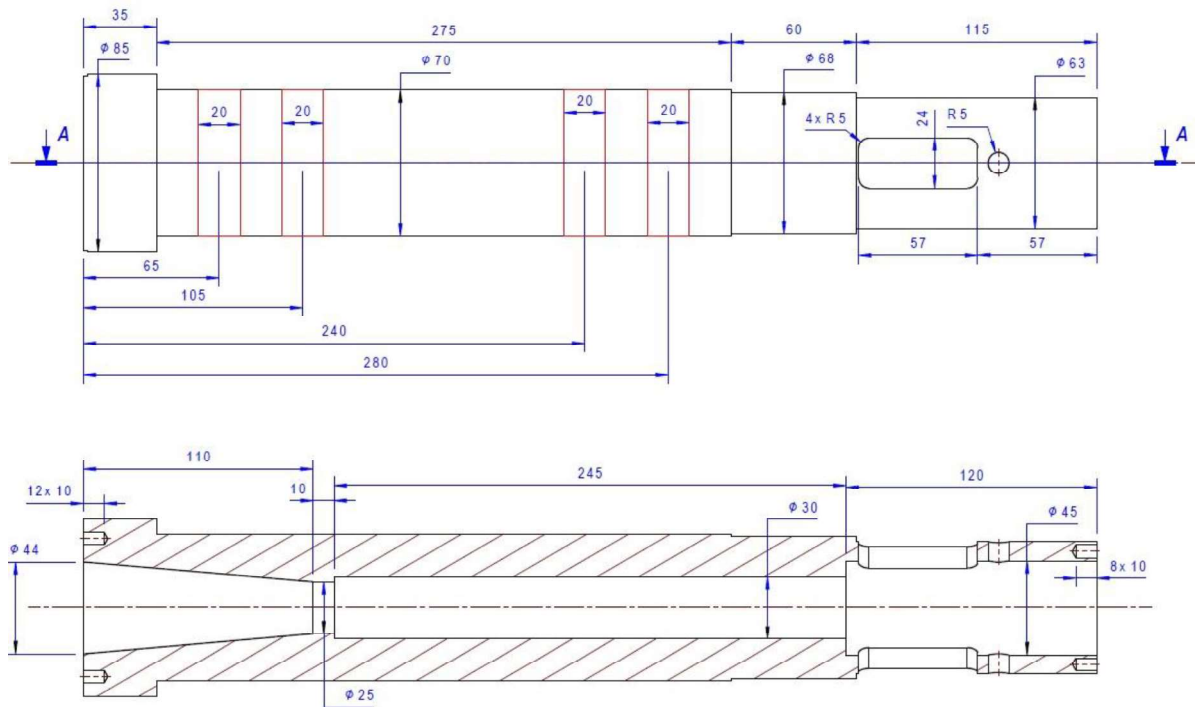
Dimensions of the Shaft of the Spindle and Bearing Locations
